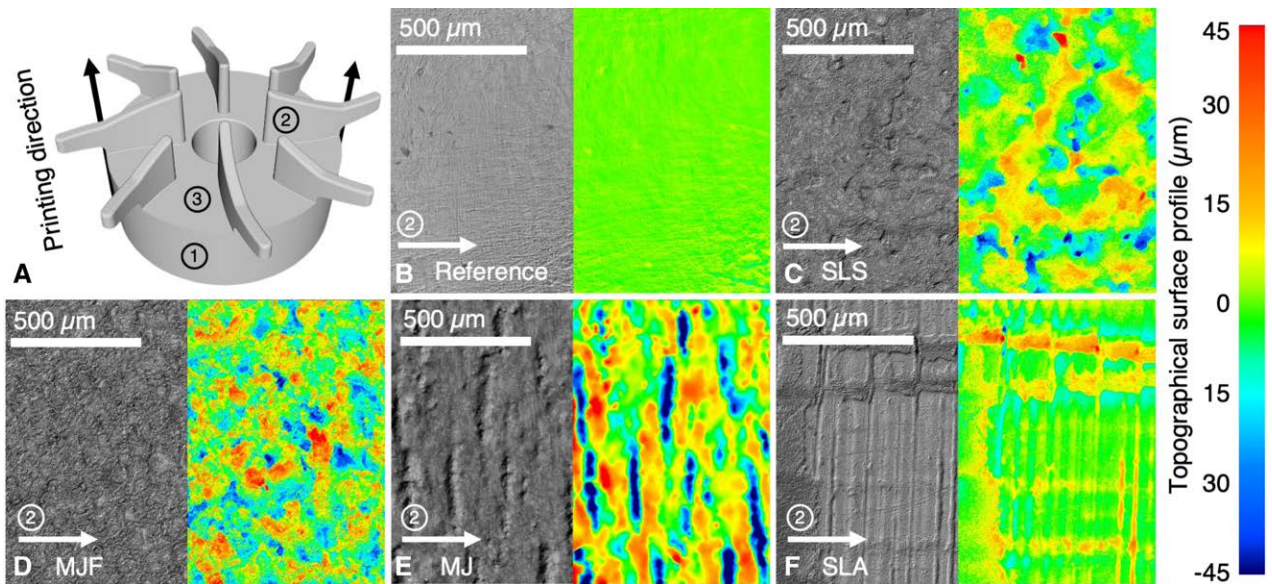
Surface roughness measurements of the CentriMag impellers. (A) Indication of the printing direction and the locations of surface roughness measurements (1: sidewall of impeller body, 2: sidewall impeller blade, 3: top side of impeller sidewall impeller blade). (B)–(F) Exemplary laser scanning microscopy images (left) and color-coded topography (right, from blue = lower to red = higher) at the sidewall of an impeller blade of the (B) reference impeller and the replicas manufactured by (C) SLS, (D) MJF, (E) MJ, and (F) SLA (Table 1). MJ, material jetting; MJF, multi-jet fusion; SLA, stereolithography; SLS, selective laser sintering.
